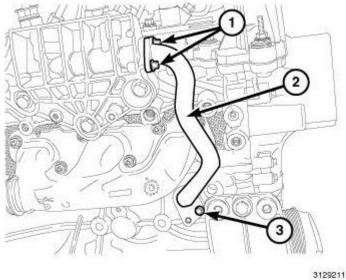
Turbocharger-To-EGR Cooler Tube Clamp Courtesy of CHRYSLER GROUP, LLC
